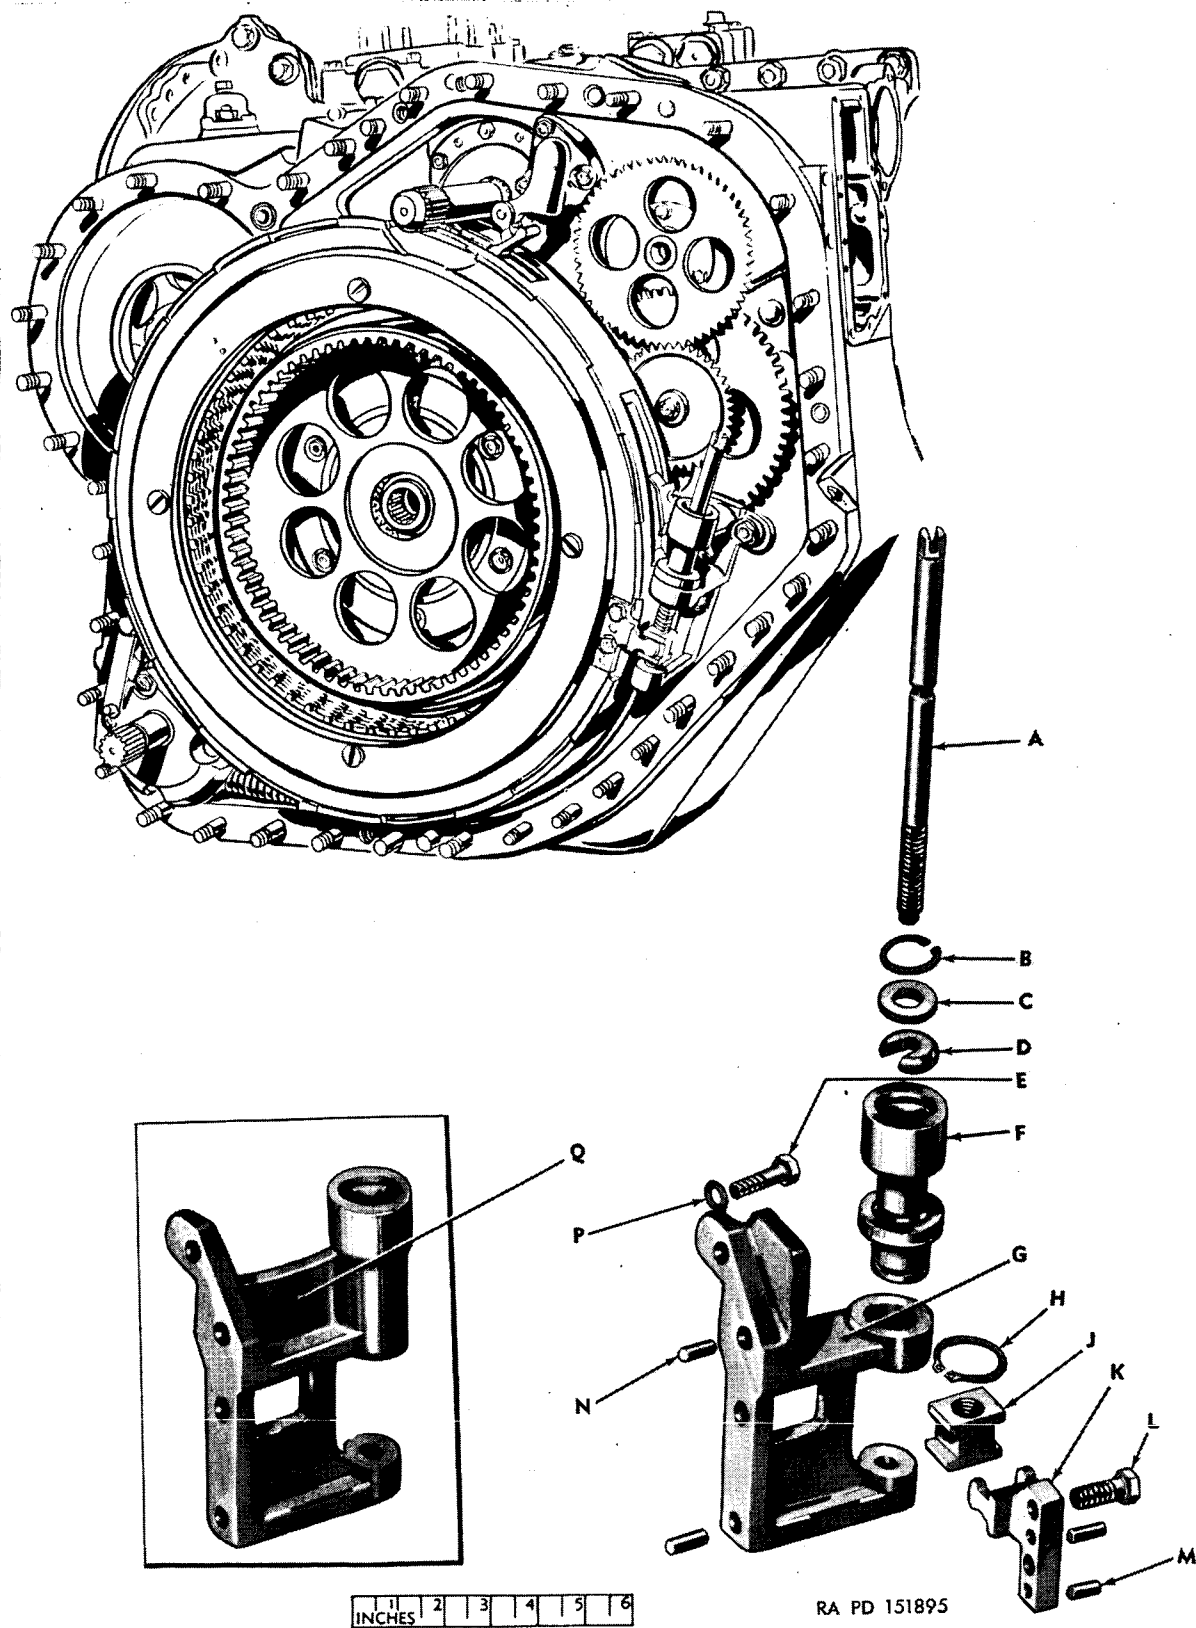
Left-brake adjusting bracket assembly—exploded view.
